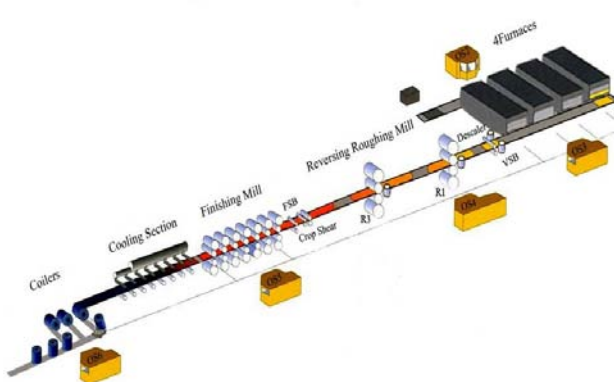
Hot rolling mill of Mobarake Steel Complex (MSC)
